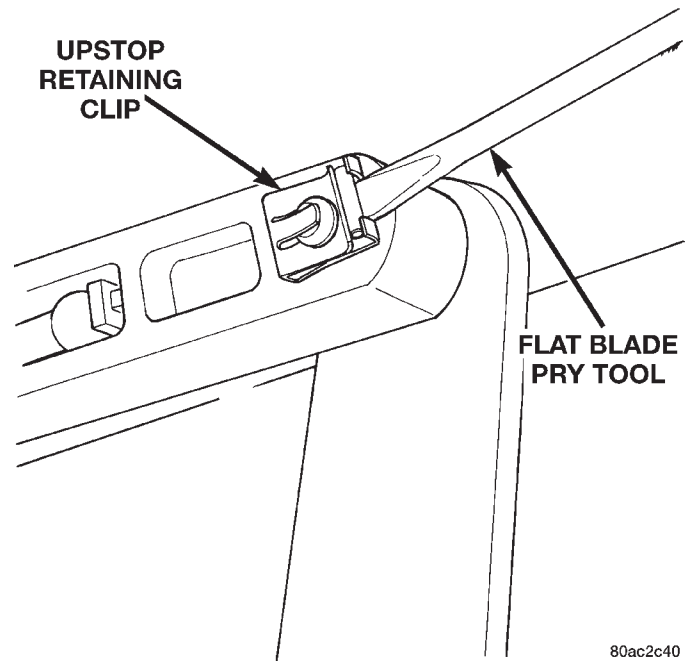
Clutch Cable Retaining (Upstop) Clip — LHD
